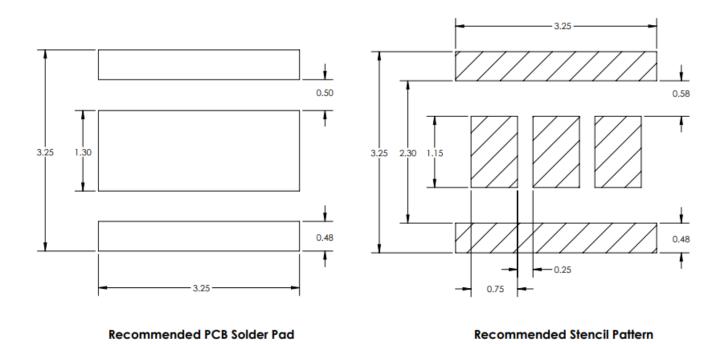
Example of recommended Solder Pad and Stencil Pattern (Images are enlarged to show detail; all dimension numbers are in millimeters).
